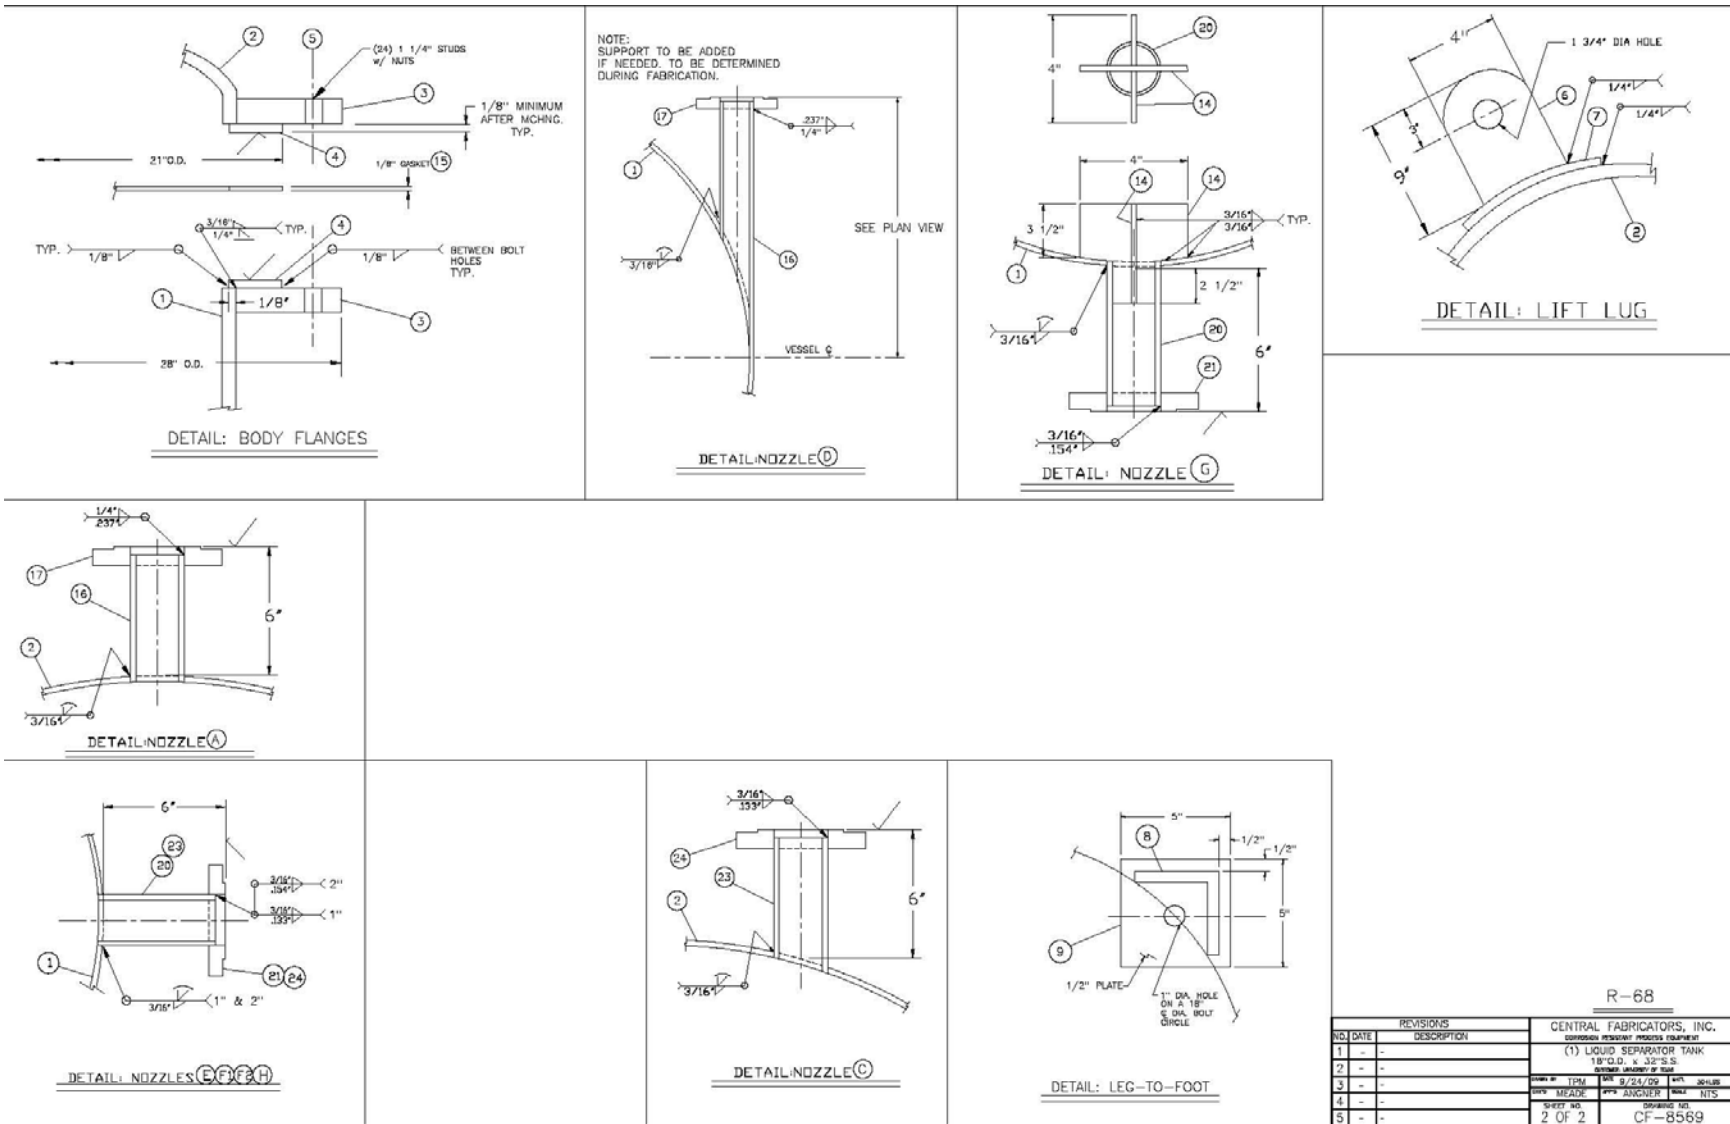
Final drawing for low pressure gas-liquid separator – close-up details
